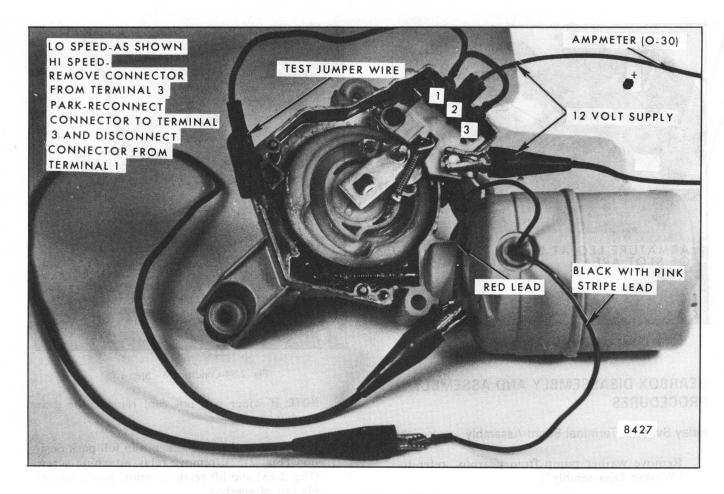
Modified Pulse Motor Bench Operation Test
